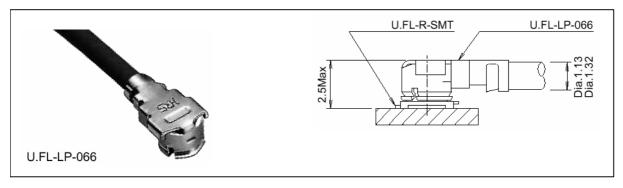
U.FL-R-SMT connector with U.FL-LP-066 plug
